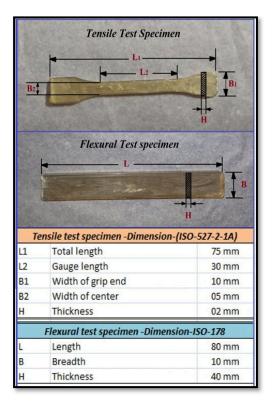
Dimensions of injection moulded specimens for tensile and flexural measurements as per ISO standards.
